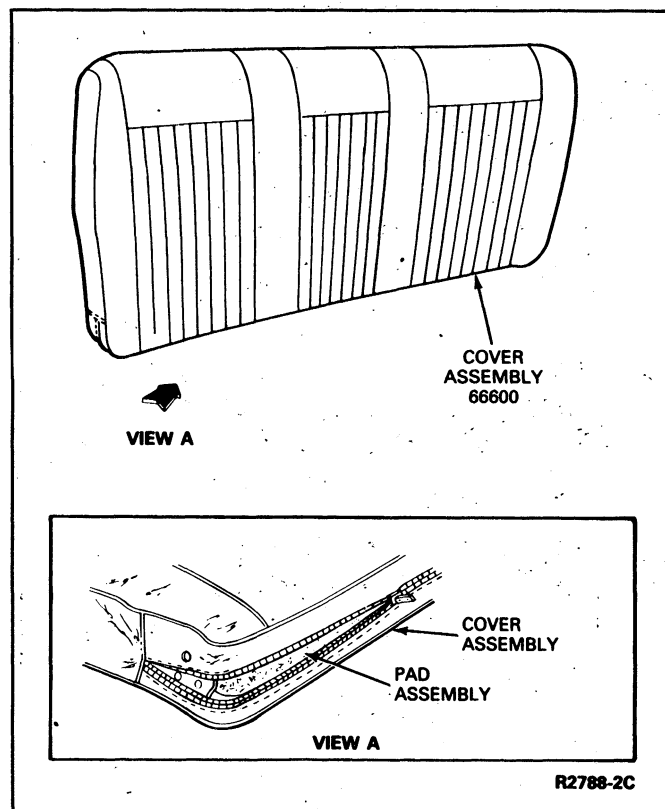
Rear Seat Back Cover Assembly—Bronco
